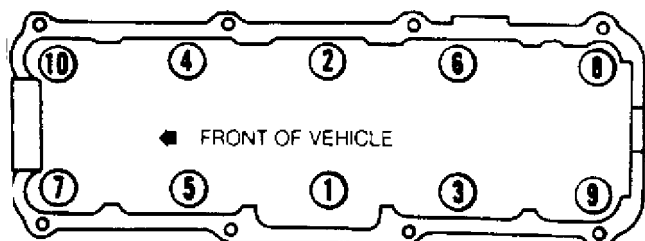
Cylinder Head Bolt Tightening Sequence
